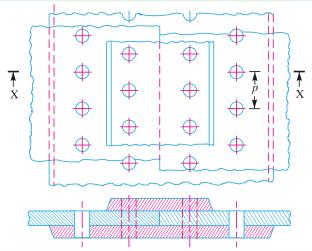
Double riveted double strap (unequal) butt joint with zig-zag riveting.
